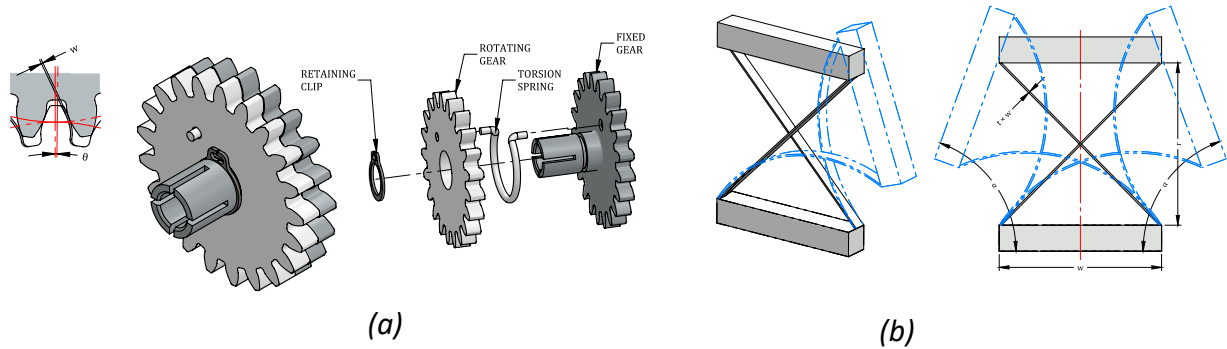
(a) Anti-backlash Gear (multi-component); (b) Large Angle Cross-axis Flexure
